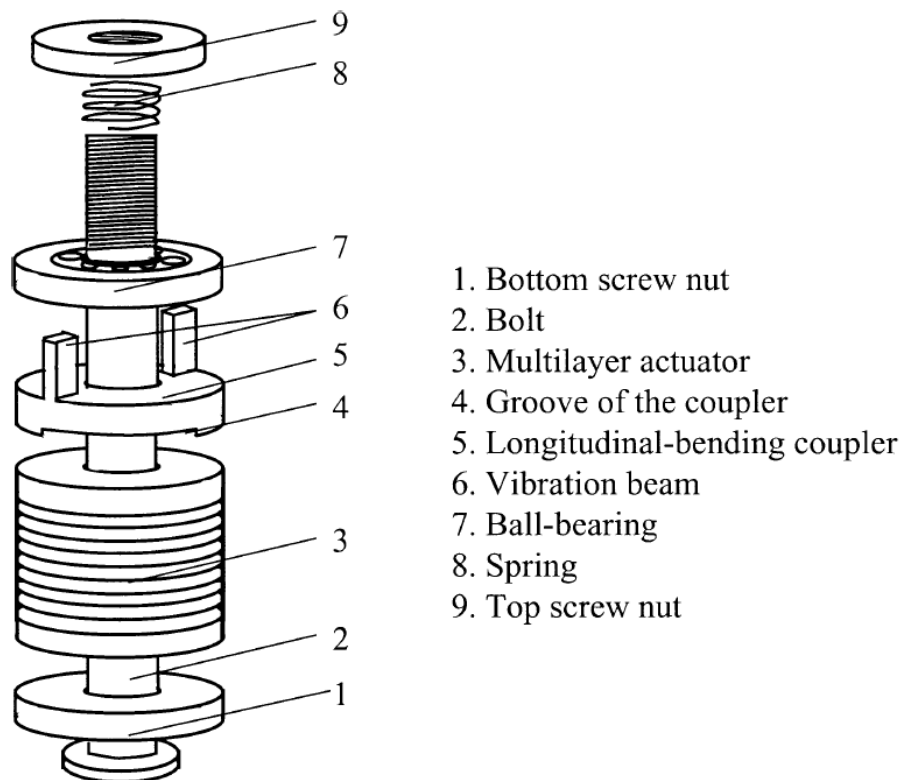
Stacked PZT ring motor design by Yao [23].
